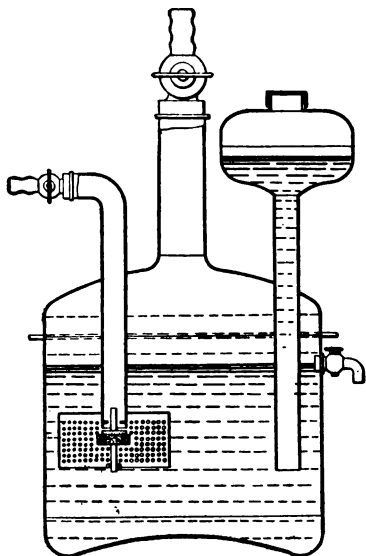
Cross section of water seal equipped with gas pressure chamber.
